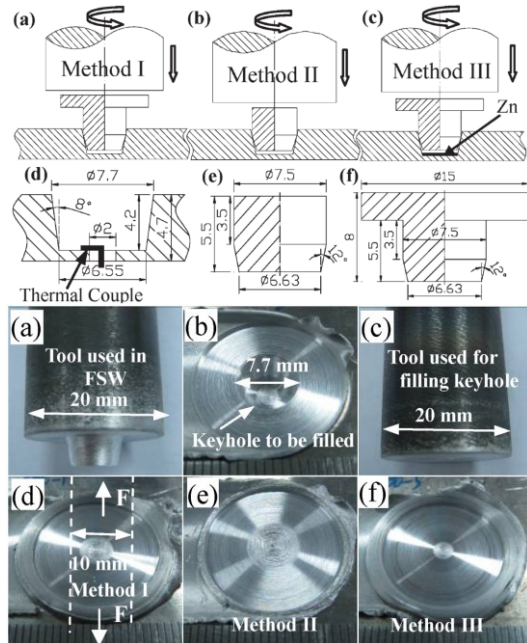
Top: schematic diagrams of filling keyhole processes using filler bits, a-c: filling processes, d: keyhole size, e and f filler bit sizes; Bottom: The test results before and after filling keyhole processes, mechanical test illustration and used tools [38]
